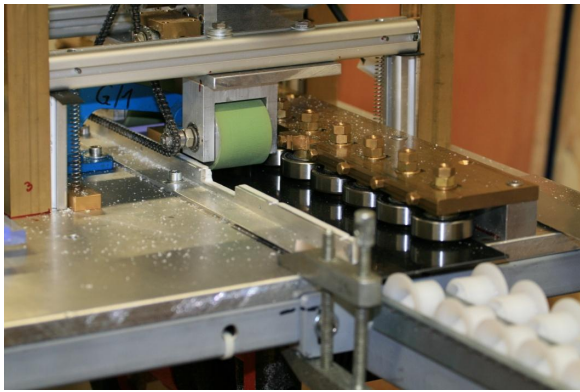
Left: Milling machine for the fibre grooves. The scintillator strips are pulled through from the front side; two saw blades (not seen) mill the grooves from the bottom. Cooling is done with pressurised air
